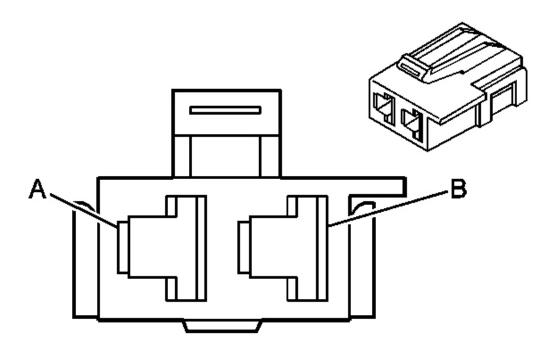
Clutch Start Switch (MM6/MZ6) Connector End View Courtesy of GENERAL MOTORS CORP.
